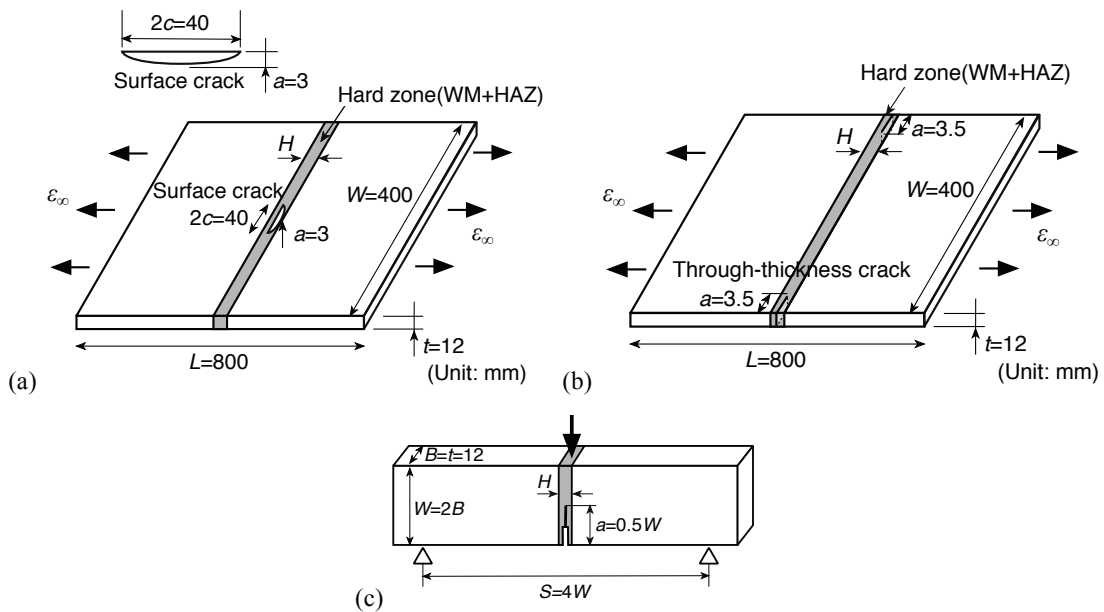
Wide plates and 3-point bend specimen with crack in welds (a) CSCP; (b) ETCP; (c) 3-point bend specimen.
